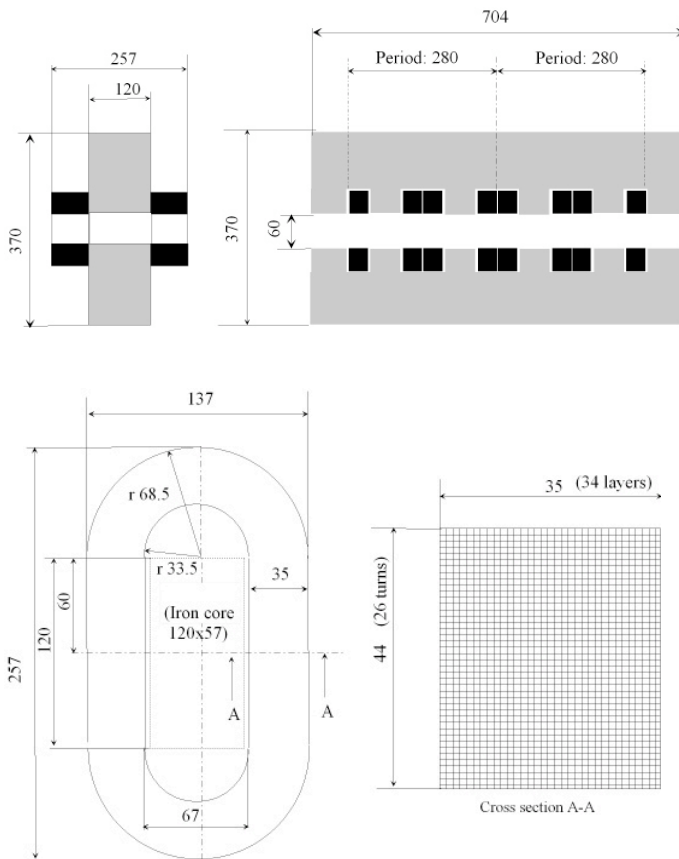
Undulator layout and coil details. Dimensions are in mm.
